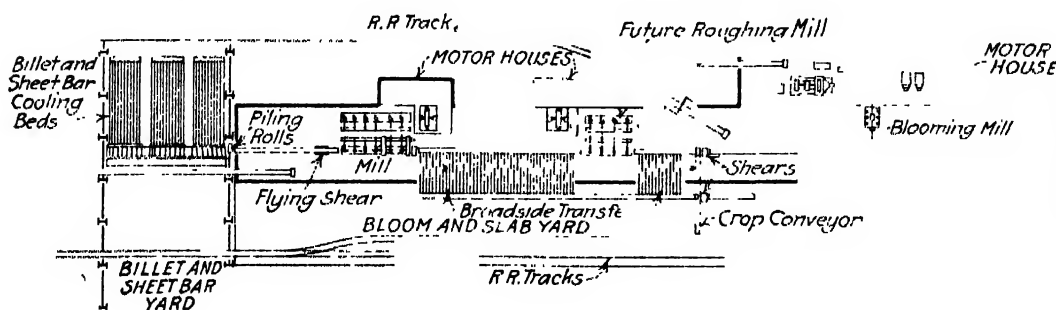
Blooming Mill and Continuous Billet and Sheet-Bar Mill, the Roughing Mill Being for Future Installation
